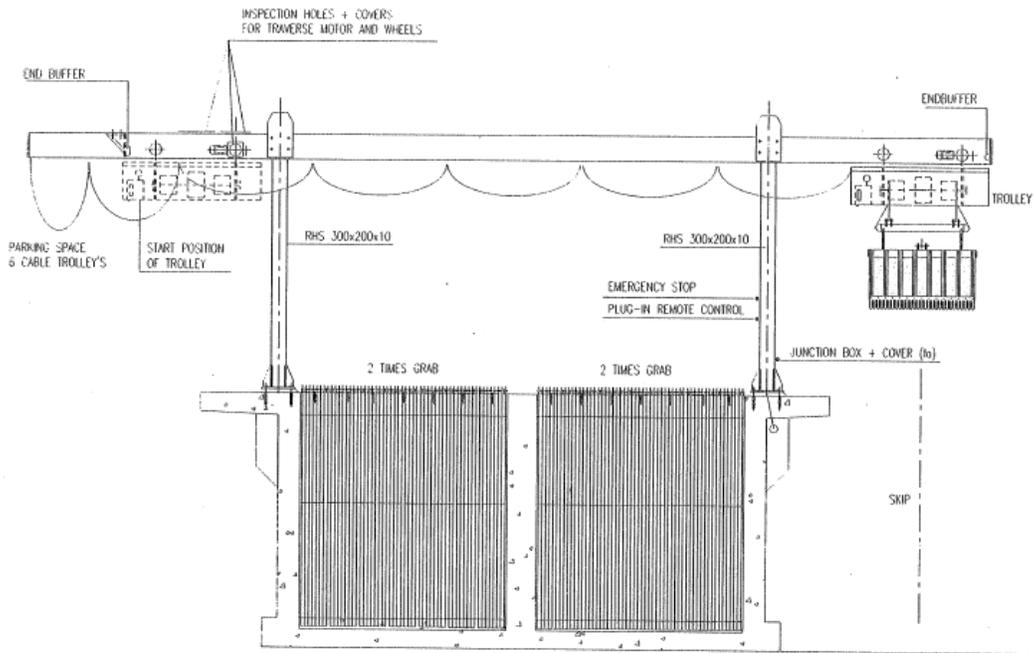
Typical Brackett Bosker Raking Machine longitudinal view
